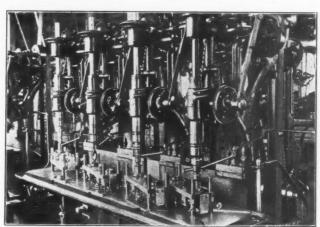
Gang Drill used in Drilling and Reaming Connecting-rod End suitable clutch connection, the pinion shafts by which the spindle quills are fed up and down. It is thus possible to give a rotating and reciprocating movement to the spindles, either tegether or separately.
